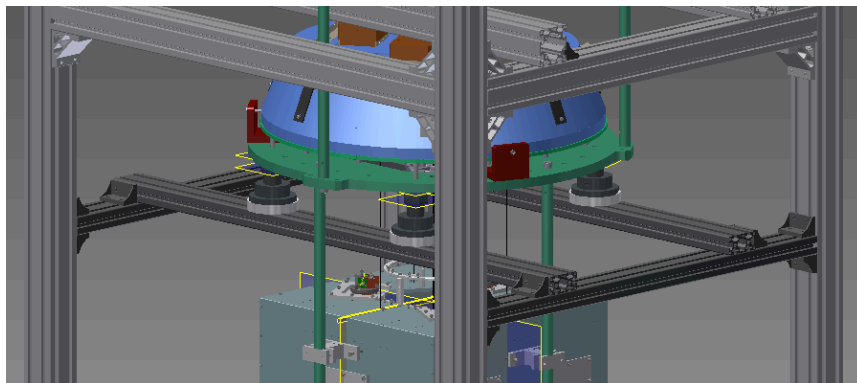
Bottom Filter section of frame, with crossbars supporting the BF via jacks.
